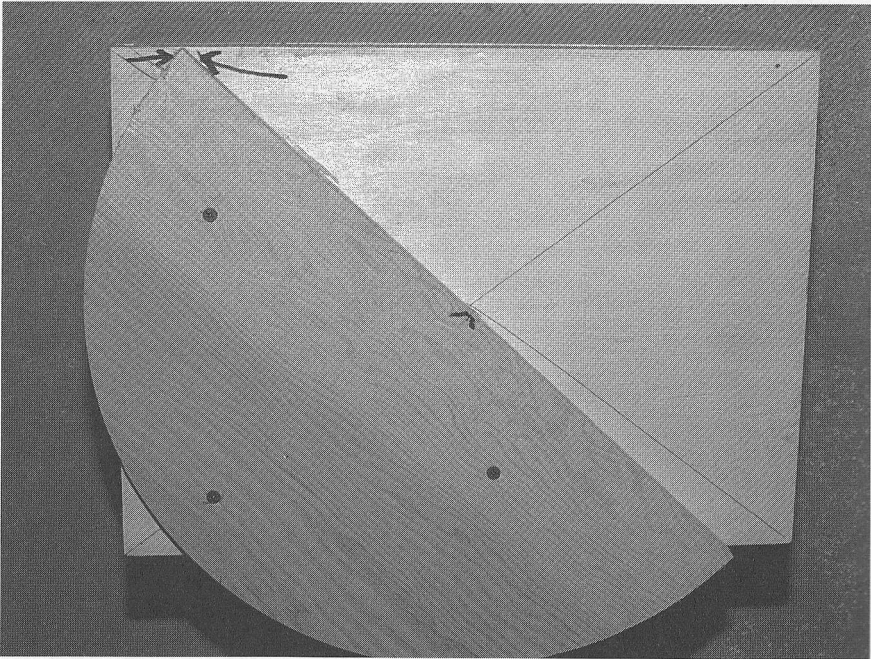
The center of the side bearing coincides with the center of the tube cradle, and the ends of the flat side of the side bearing cross from one side of the tube cradle to the other.
